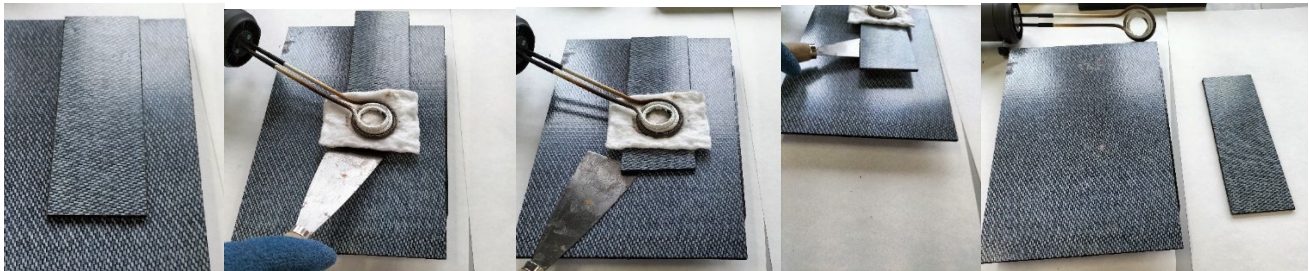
1) Welded composite part on a base plate, 2) induction heating
